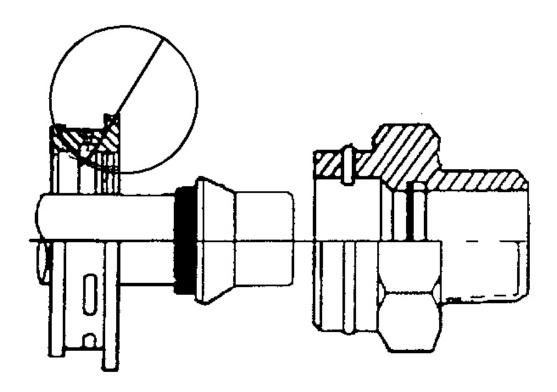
View Of Cooler Line Quick Connect Fitting Courtesy of GENERAL MOTORS CORP.
